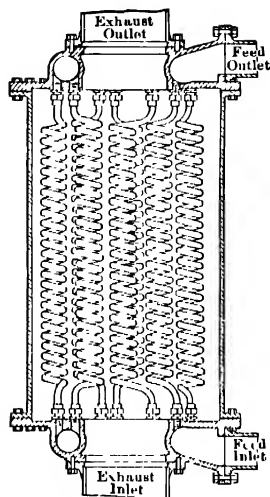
Typical Multi-tube Coiled Closed Heater. (Reilly.)
